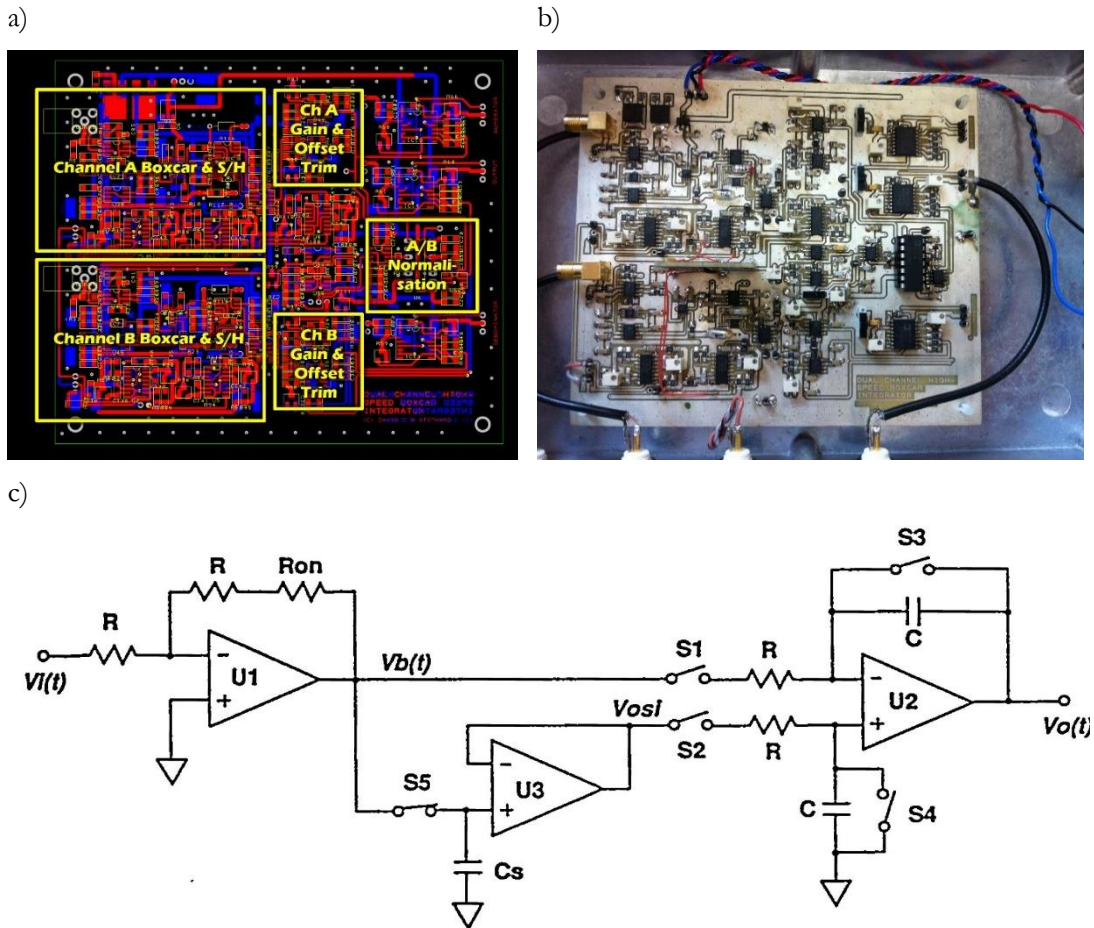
The Boxcar Integrator electronics: PCB layout (a), photograph of ready board (b) and the electronic circuit of the integrator part (c).
